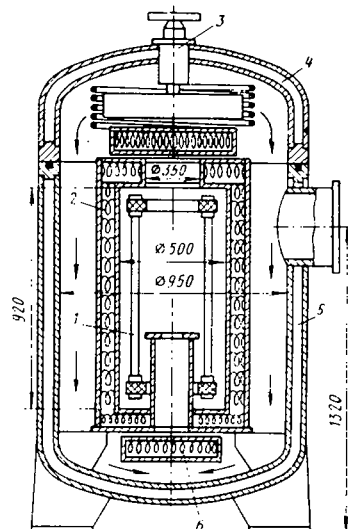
SShV-3.3/13G electric vacuum shaft furnace. 1) Heating element; 2) thermal insulation; 3) fan; 4) cover; 5) frame; 6) blind.
